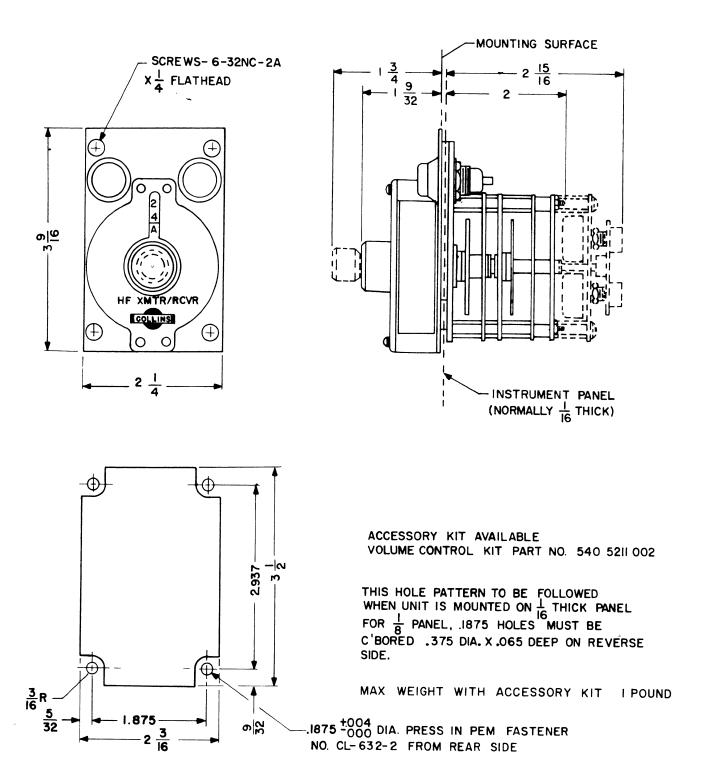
Remote Control Units 614D-3, Outline and Mounting Dimensions
